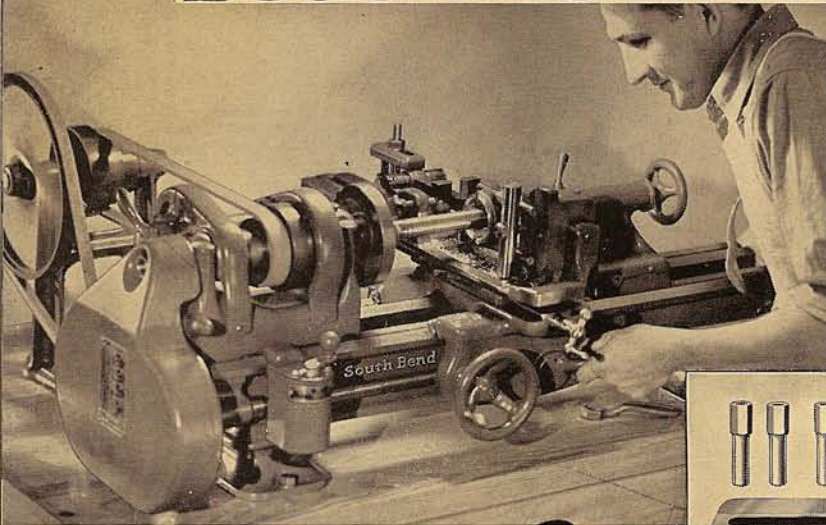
Boring a Re-babbitted Connecting Rod Bearing in the 9-inch "Workshop" South Bend Lathe.
